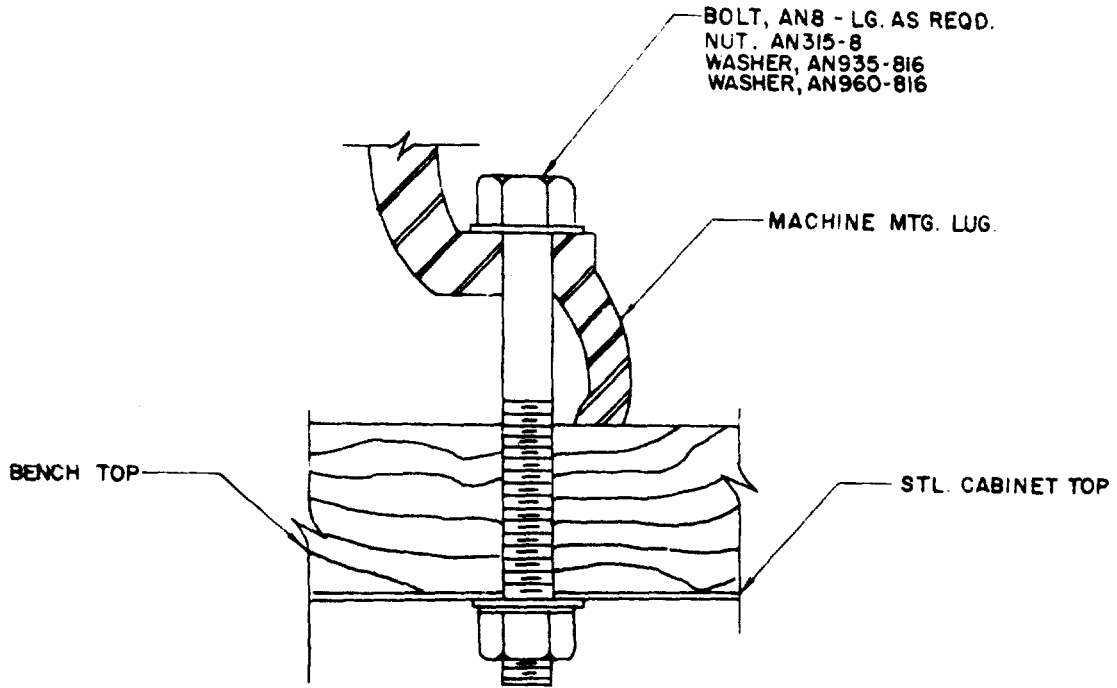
Typical mounting, armature undercutter, chain vise, and upright drilling machine.
